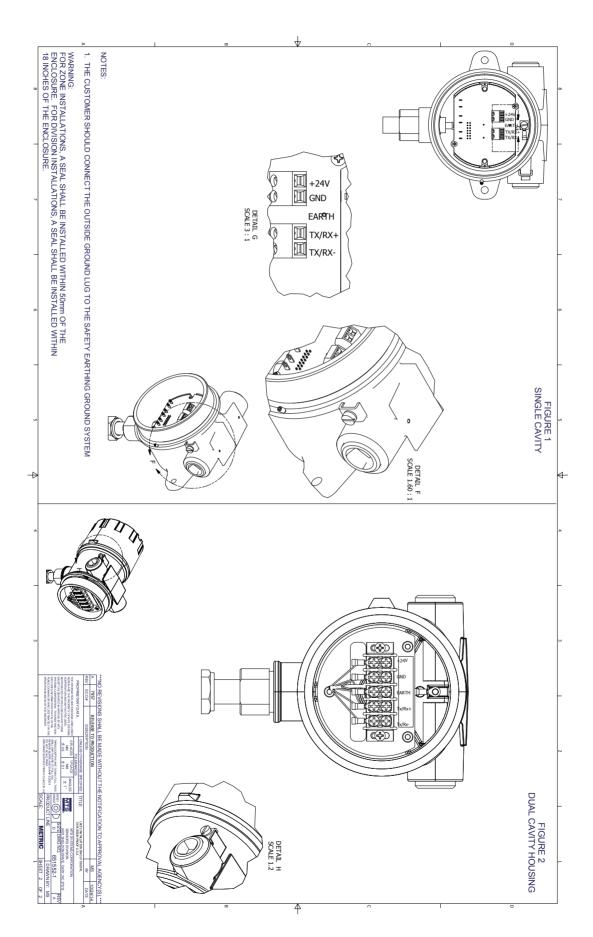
Explosionproof, FM Installation Drawing, HART®, Page 2
